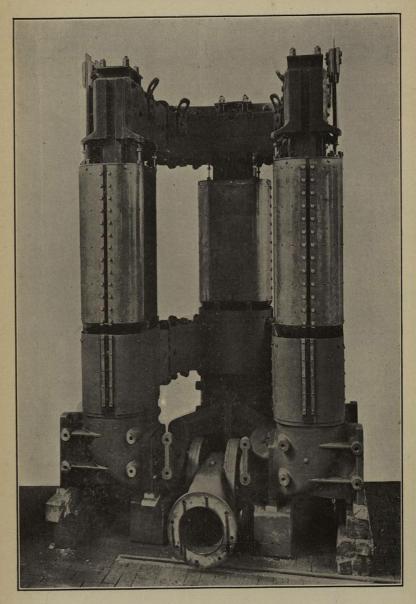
Details of Transformer Construction for Röchling-Rodenhauser Three-phase Furnace.
